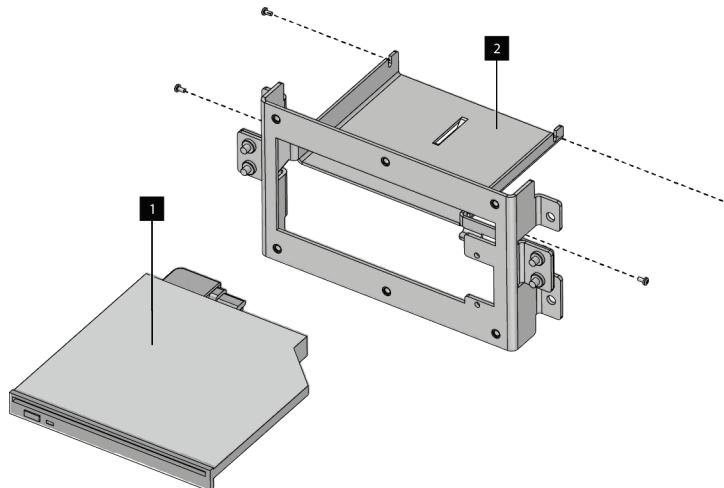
Removing the CD/DVD drive from the drive mounting bracket
